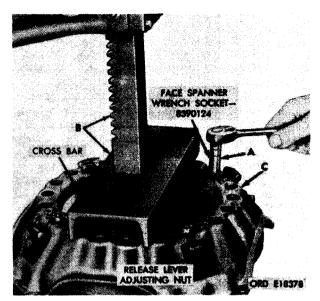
REMOVING OR INSTALLING CLUTCH COVER USING FACE SPANNER WRENCH.
